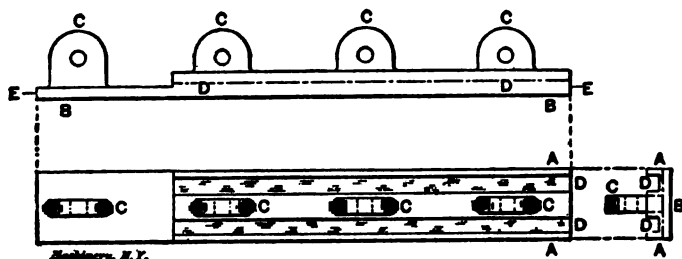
Casting Milled in Fixture shown in Figs. 63 to 66
